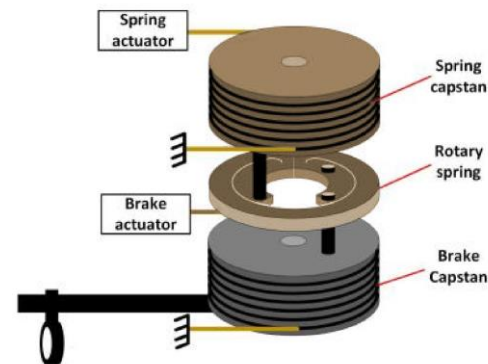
Exploded view of the rotational spring coupling the spring capstan to the brake capstan
